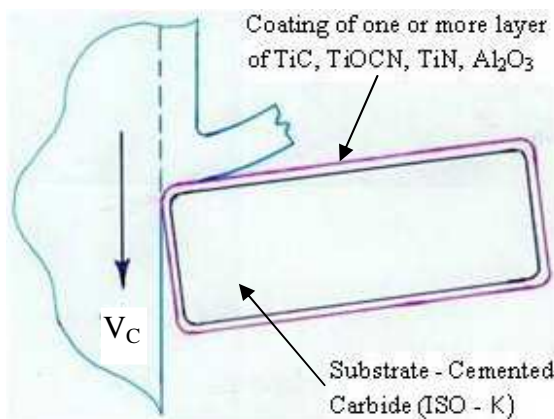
Machining by coated carbide insert. Fig. 1.45 Role of coating even after its wear and rupture
